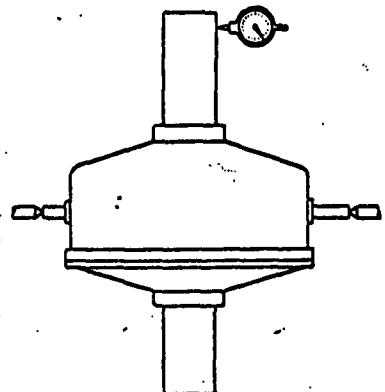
Diagram showing inspection for perpendicularity of axis pins to housing and cover axis.
